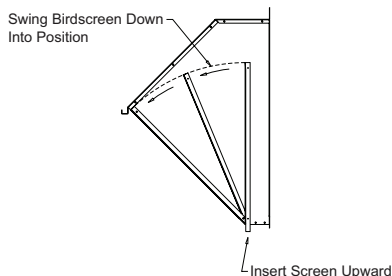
Placing Birdscreen in Assembled Weather Hood
